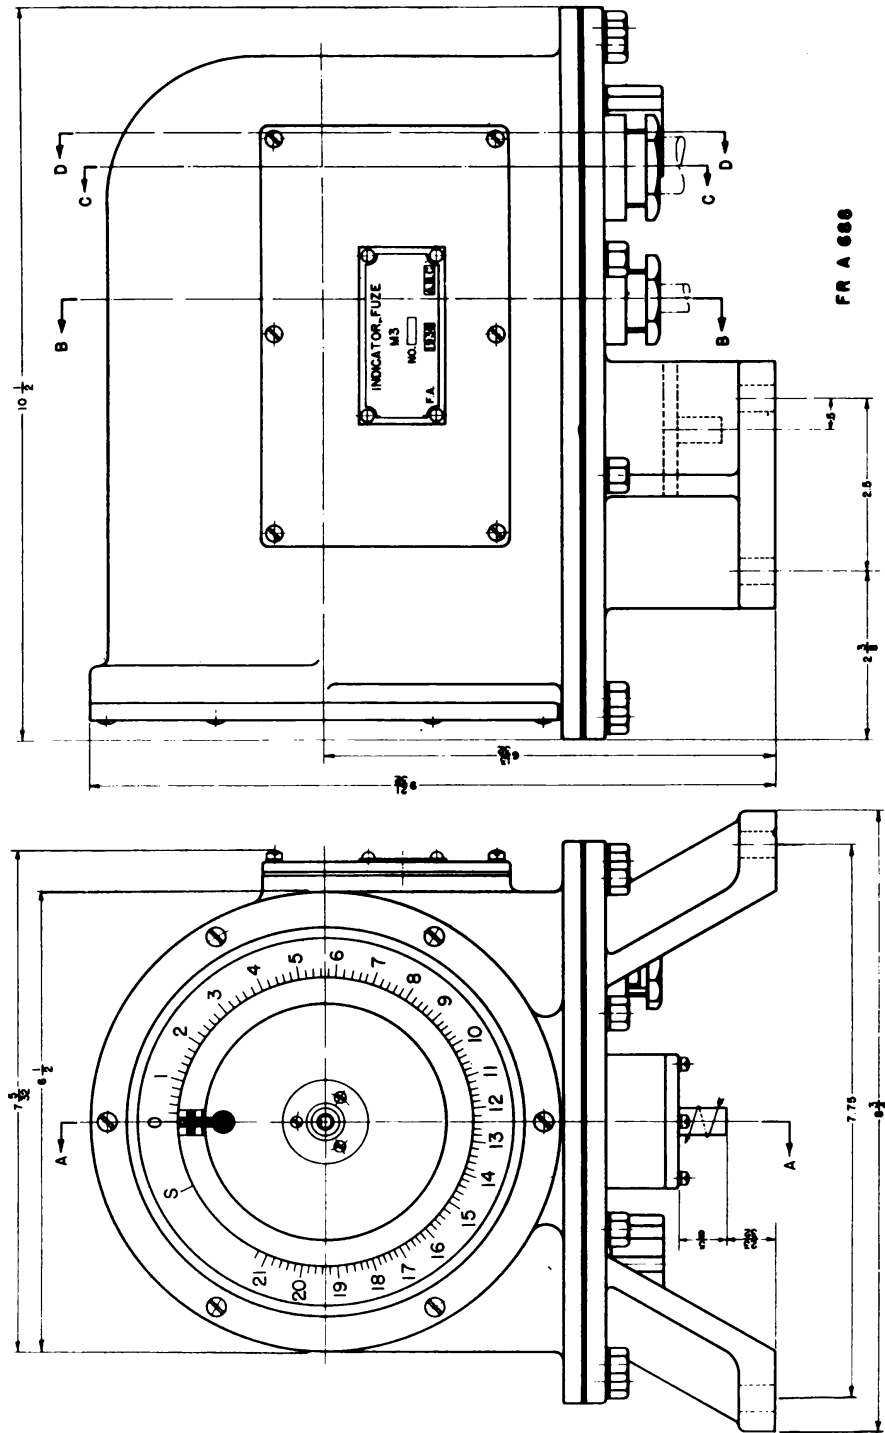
FUZE INDICATOR, M3 - ASSEMBLY
